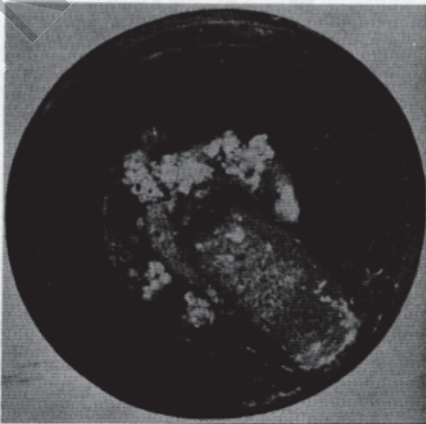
Core bridging from center electrode to shell. Fused deposits sometimes have the appearance of tiny beads or glasslike bubbles. Caused by excessive combustion chamber deposits which in turn could be the result of: excessive carbon from prolonged usage; use of improper oil or incorrect fuel-oil ratio.
